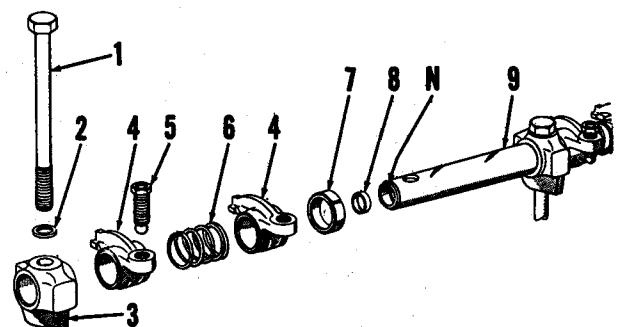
Exploded view showing rocker arms, spring and rocker arm spacer sequence for No. 1 cylinder; sequence for installation of remaining rocker arms, springs and spacers is identical. Install shaft with notch (N) up and towards front of engine.
